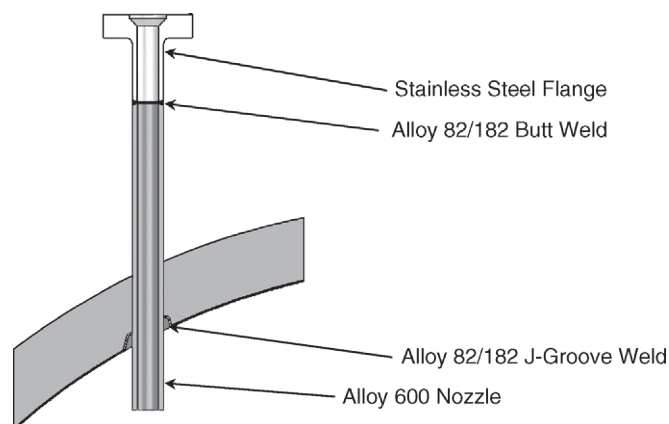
TYPICAL CONTROL ROD DRIVE MECHANISM (CRDM) NOZZLE
